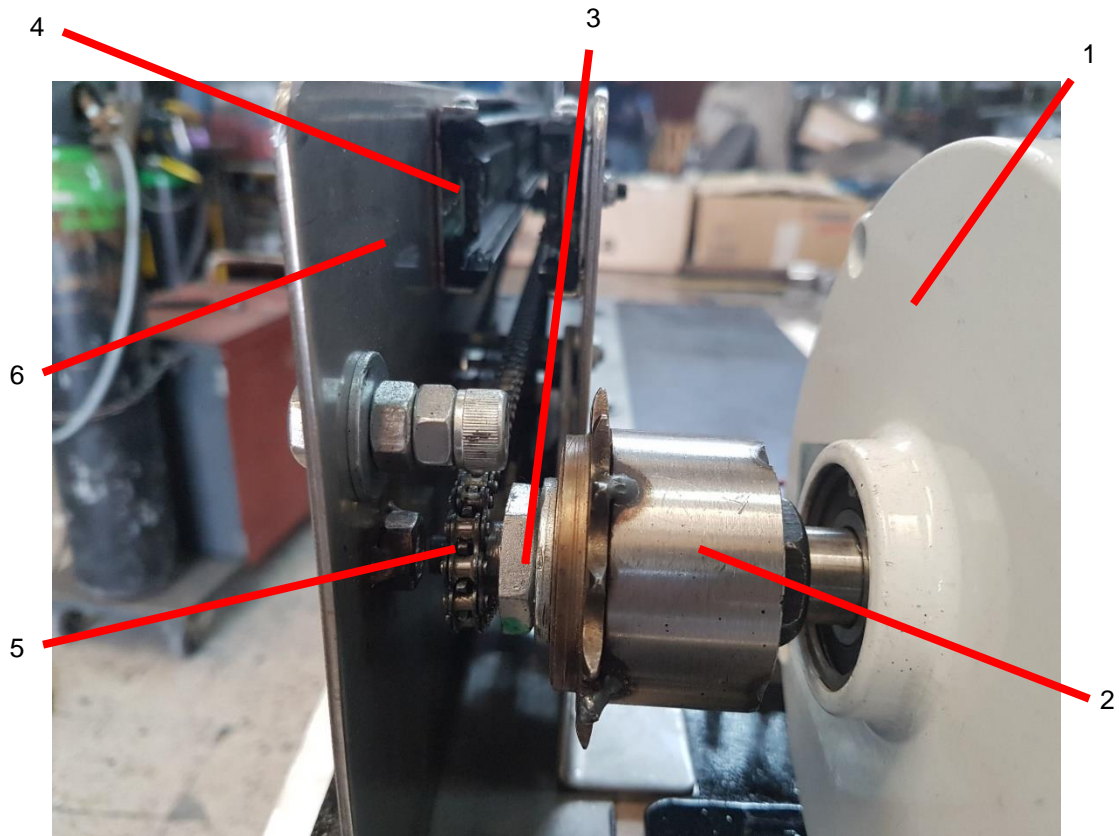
Generator (1), generator spindle/ primary reel (2), secondary reel (3), gutter (4), toothed belt (5) and stainless -steel plate (6)
